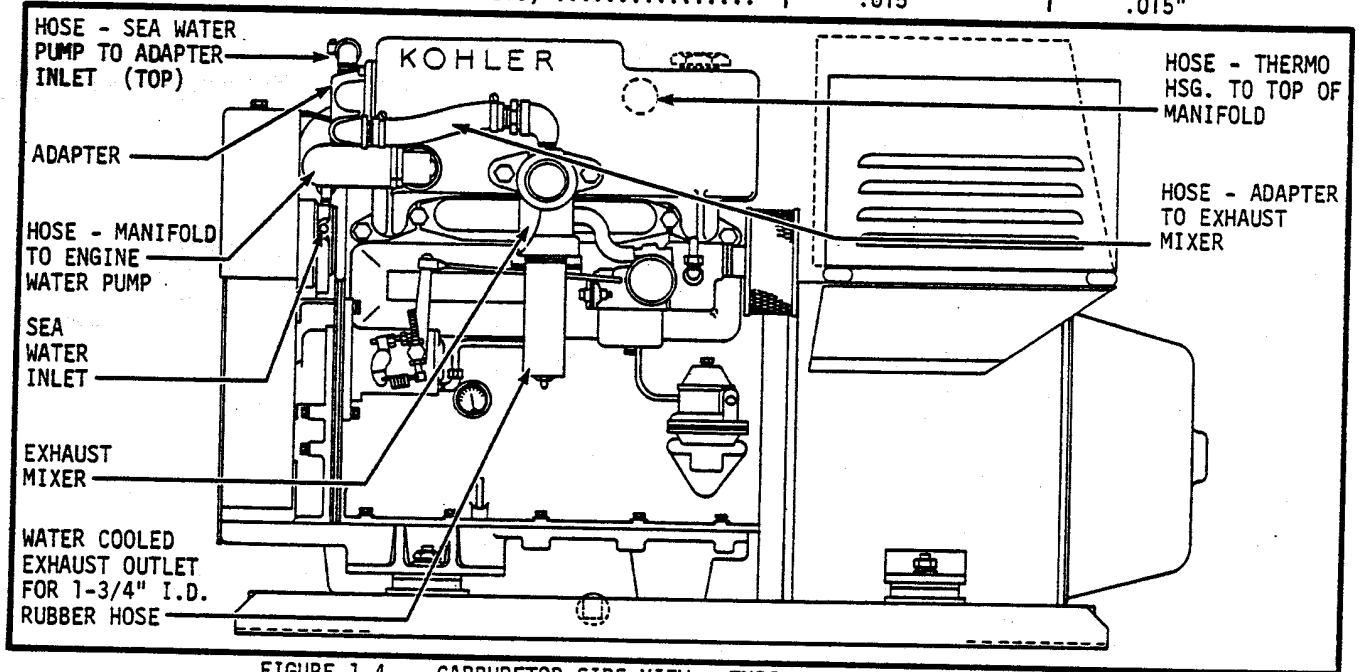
CARBURETOR SIDE VIEW - TYPICAL MARINE GENERATOR SET
